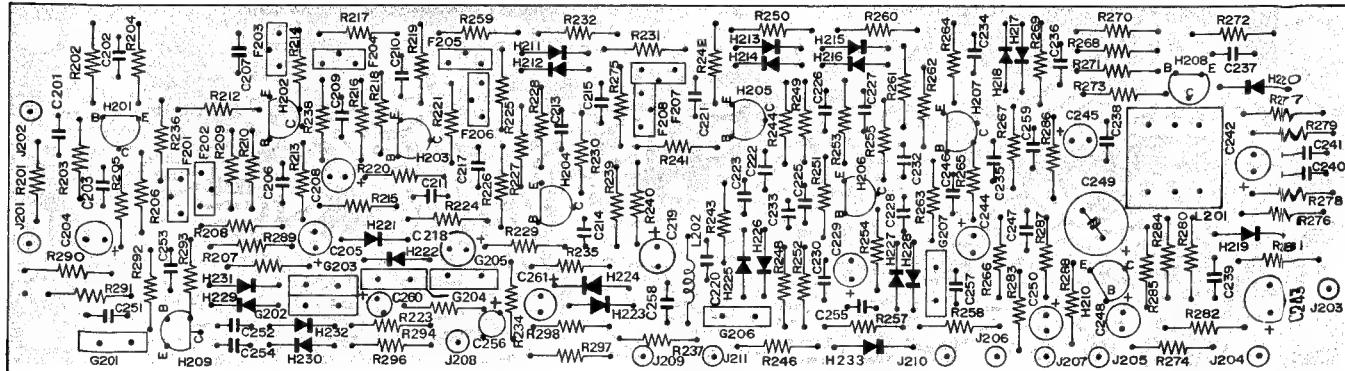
FM IF Amplifier Assembly P200 Component Locations
